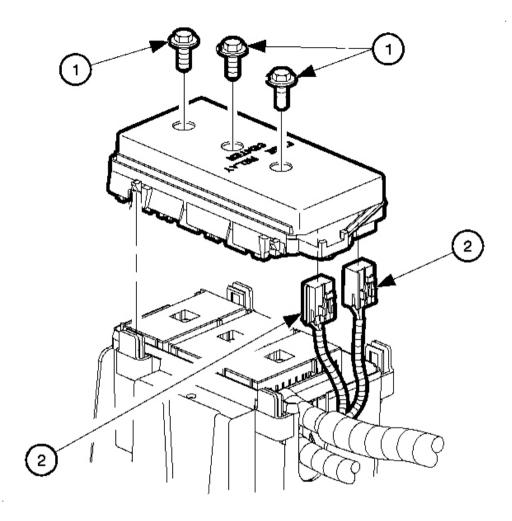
Loosening Bolts On Top Of Fuse Block Courtesy of GENERAL MOTORS CORP.
